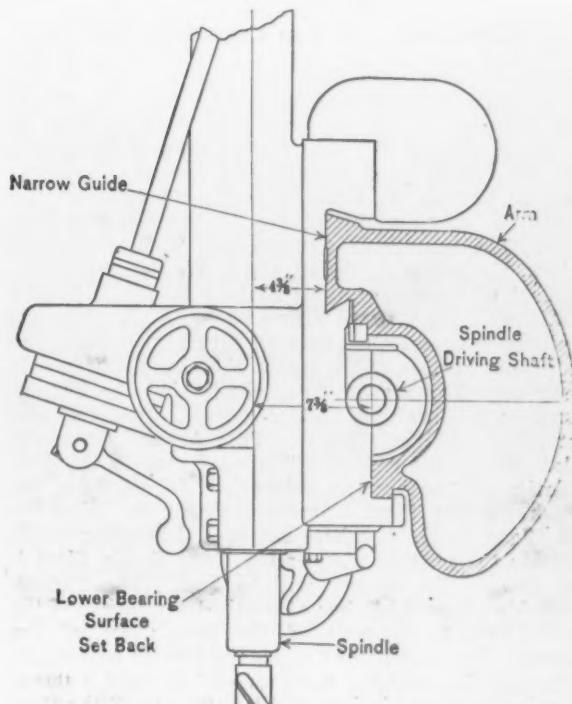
Lower Bearing Surface of New Patented Arm Is Set Back of the Upper Narrow Guide to Bring the Spindle Driving Shaft as Close as Possible to the Spindle
